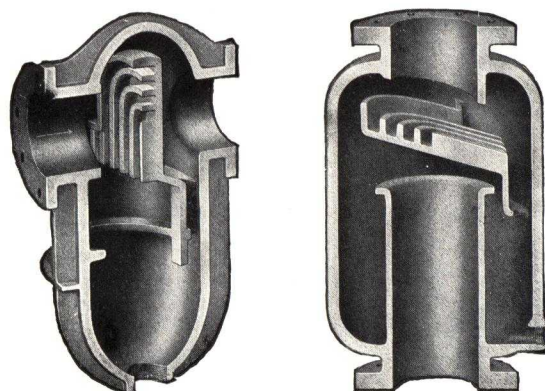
Webster Steam Separators. Horizontal Type at Left, Vertical Type at Right
